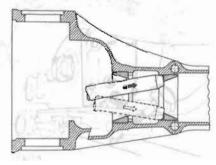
Removing Pinion Rear Bearing Inner Race
